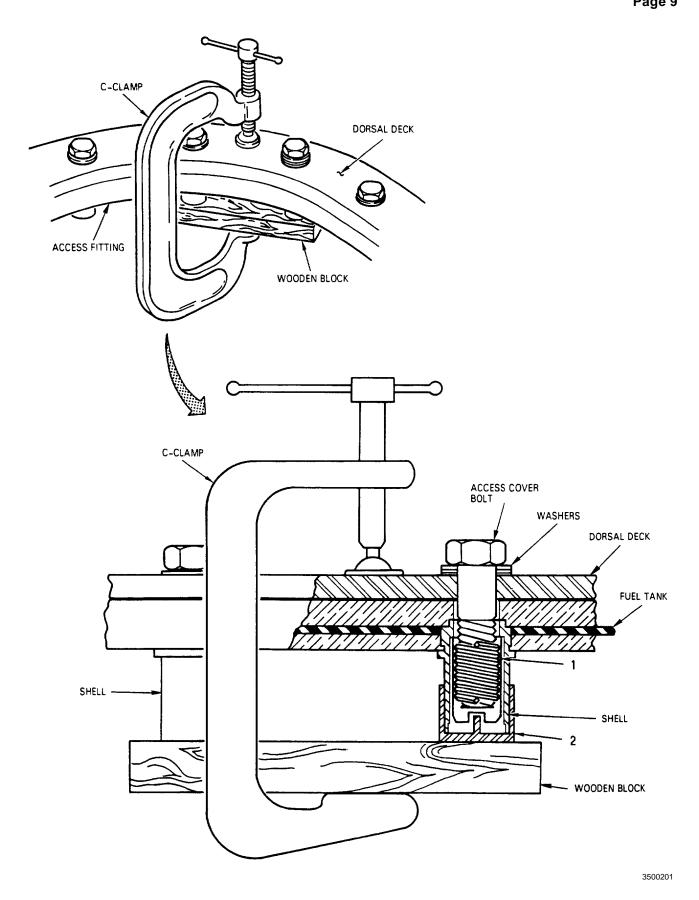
Fuel Tank Access Fitting Floating Nut Repair-Installation (Sheet 1)
